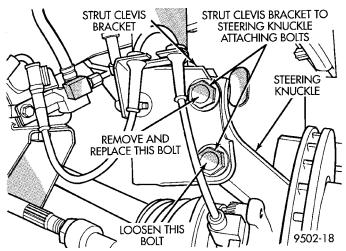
Front Strut Clevis Bracket To Steering Knuckle Attaching Bolts
